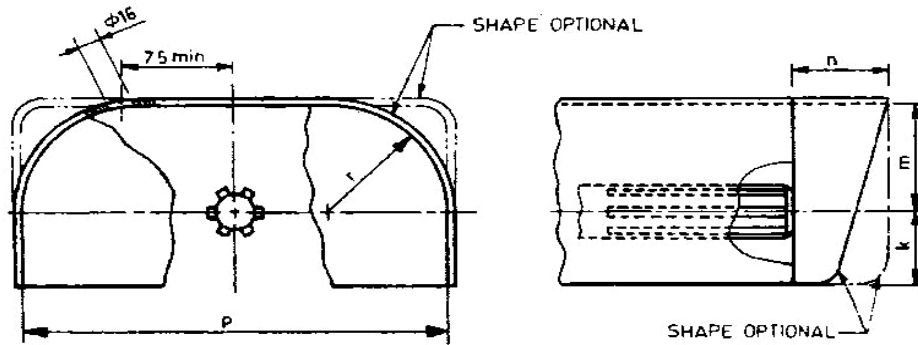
(b): DIMENSIONAL NOTATION OF PTO SHAFT MASTER SHIELD
